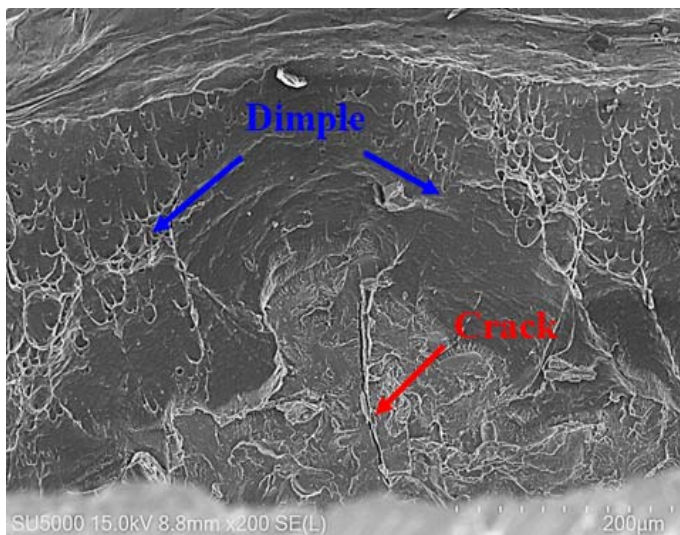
Fractured surface of welded joints with single-weld seam after tensile-shear test
